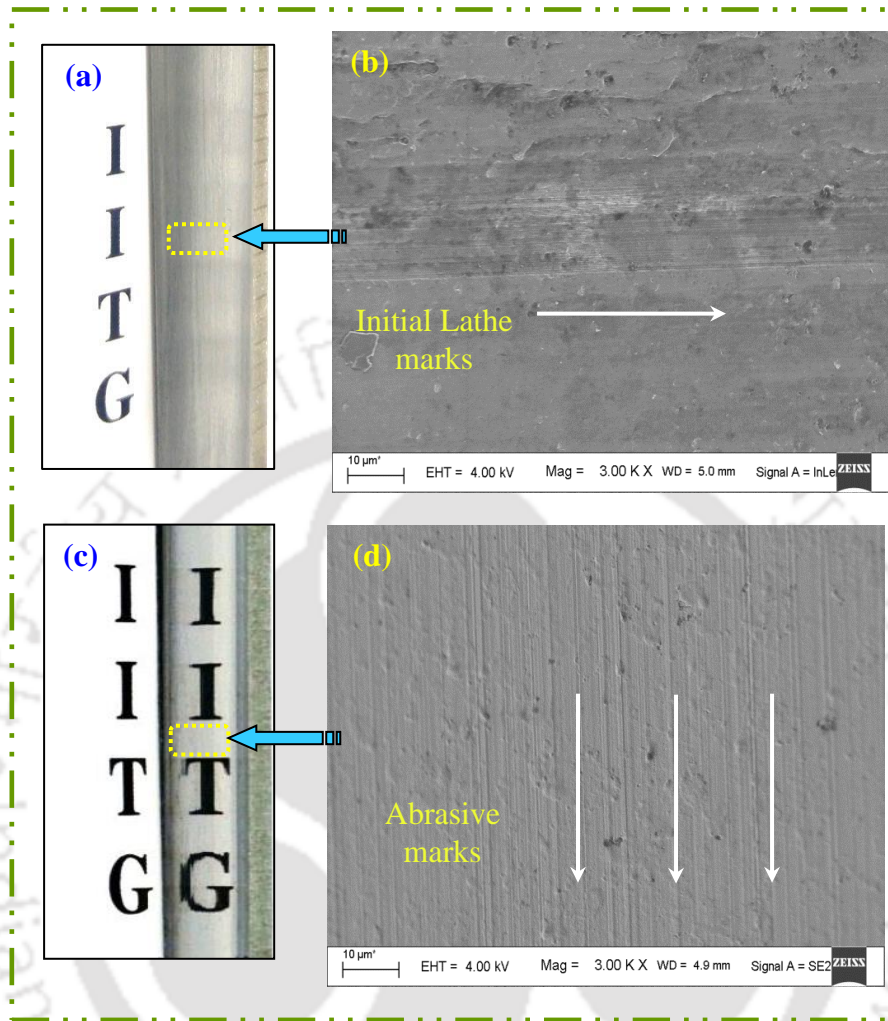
Initial workpiece surface (a) photograph of initial surface (b) topography images, finished workpiece surface (c) photograph of final surface (d) topography images (5 MPa, 550 AFF cycles, 55 % wt. % of abrasive particles).
